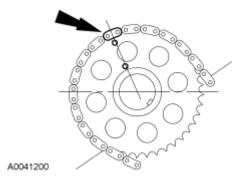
Aligning Copper (Marked) Link With Timing Mark On Camshaft Sprocket Courtesy of FORD MOTOR CO.
